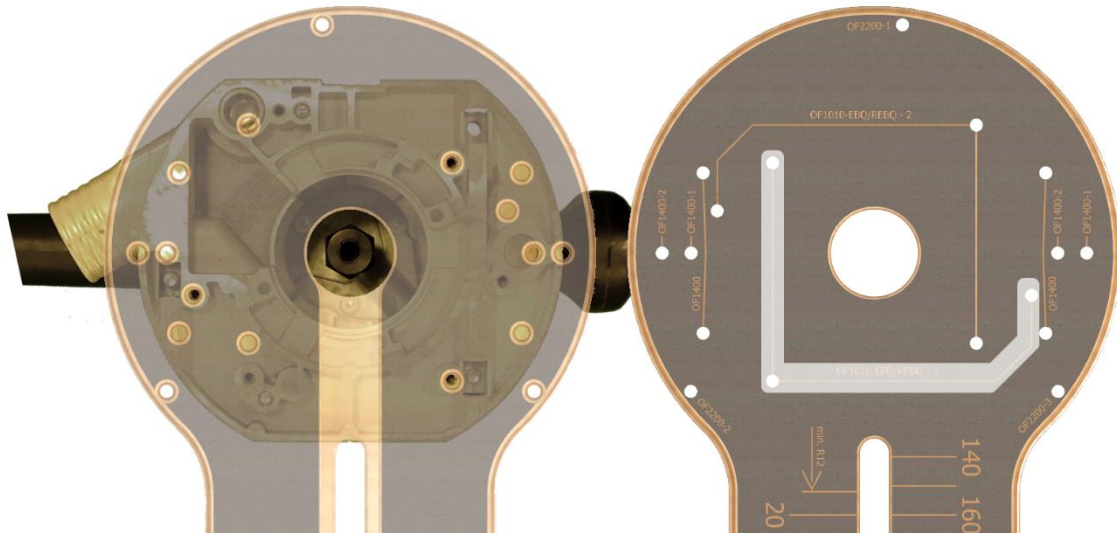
Mounting holes 1 suitable for Festool OF1010-REB
